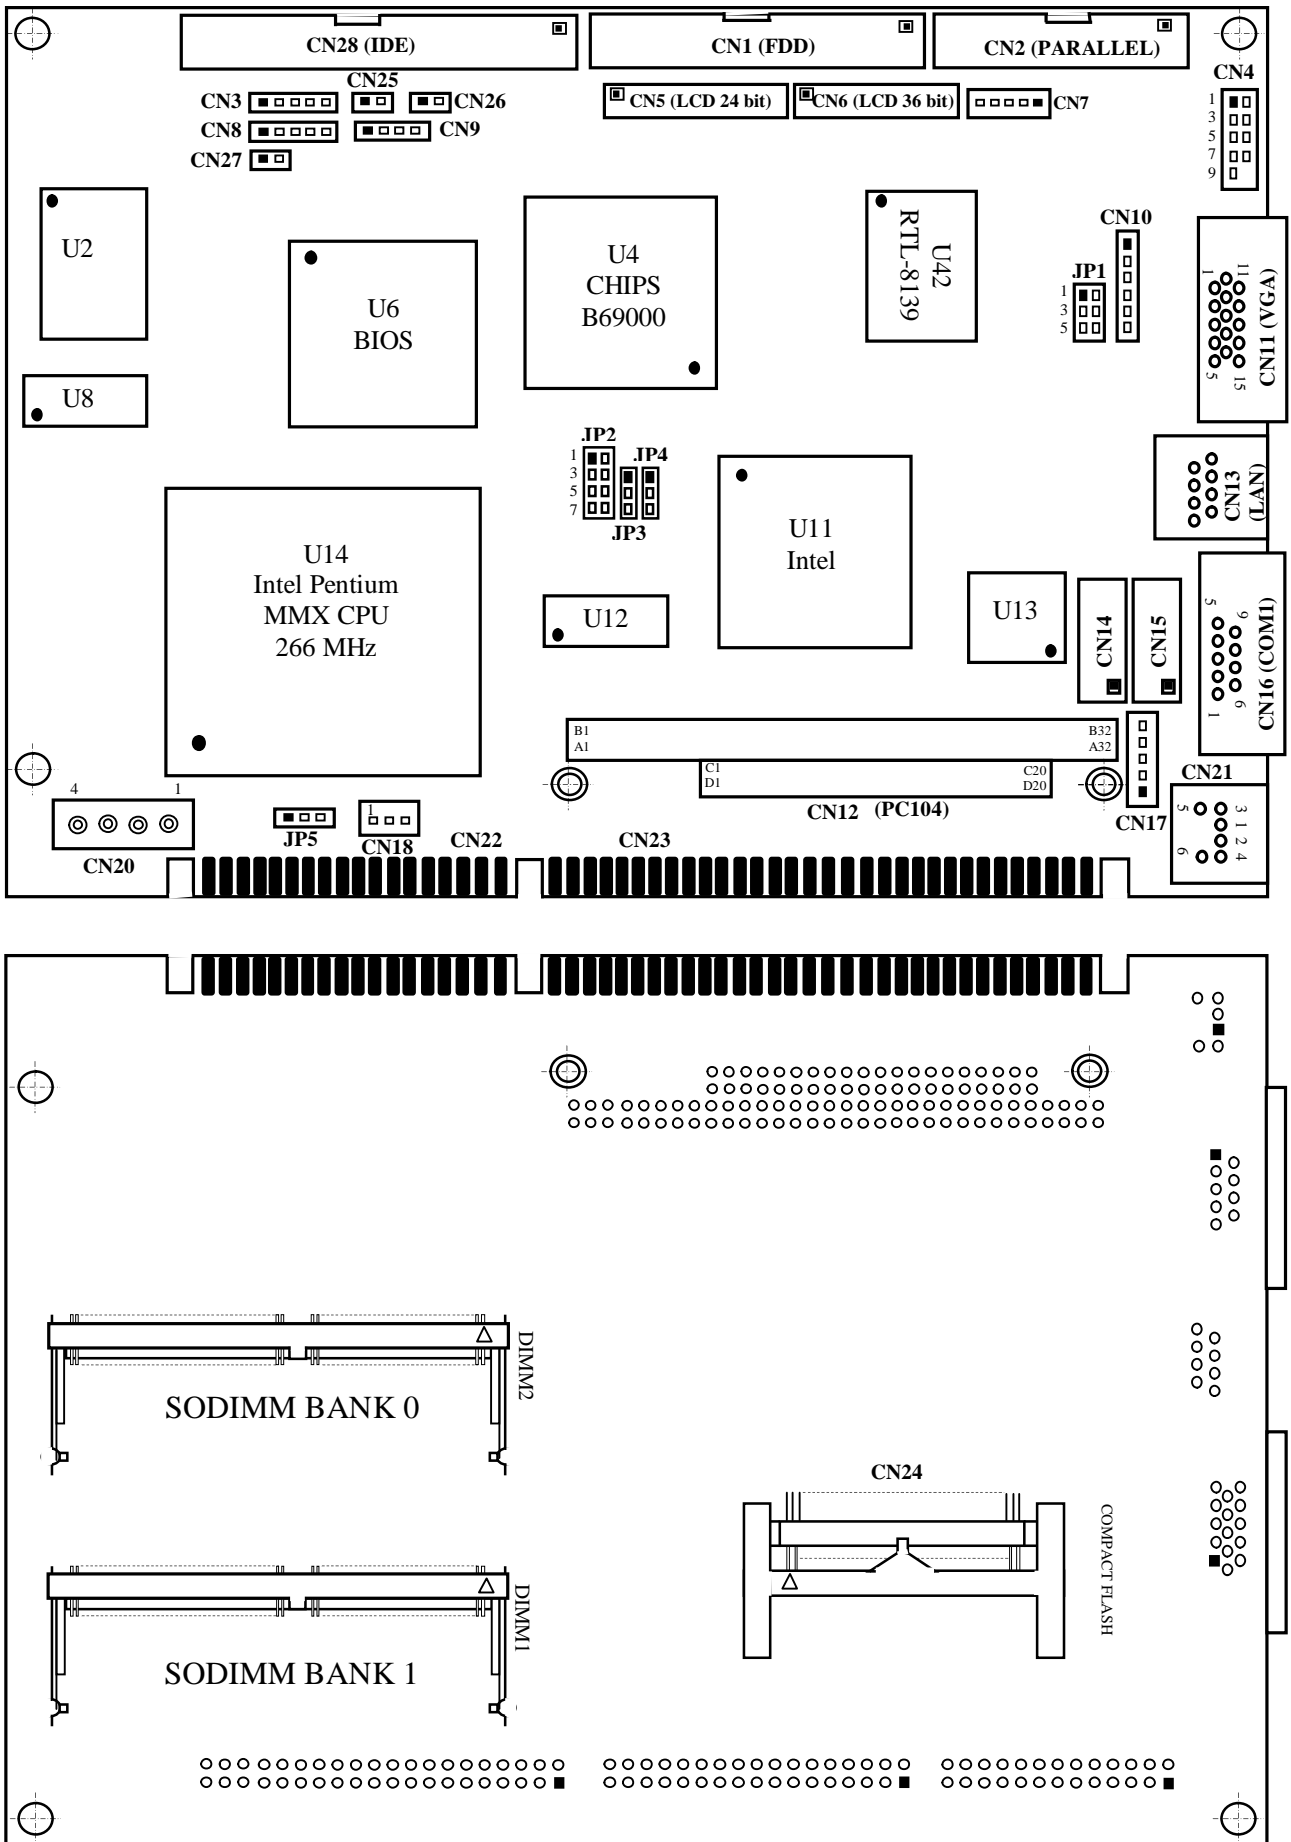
Arrangement of Connectors and Jumpers of the PCA-6751 CPU Board
